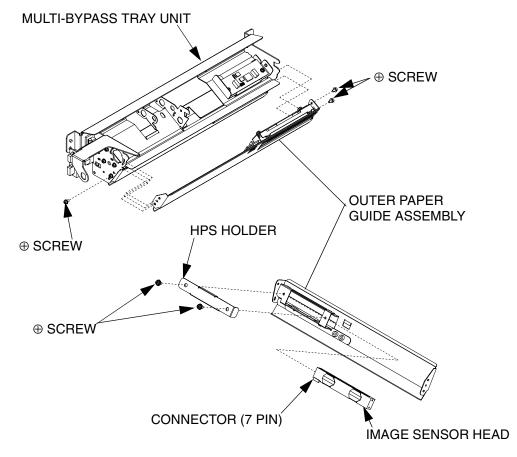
Removal of the H.POS. Sensor (Image Sensor Head): For Rear Engine
